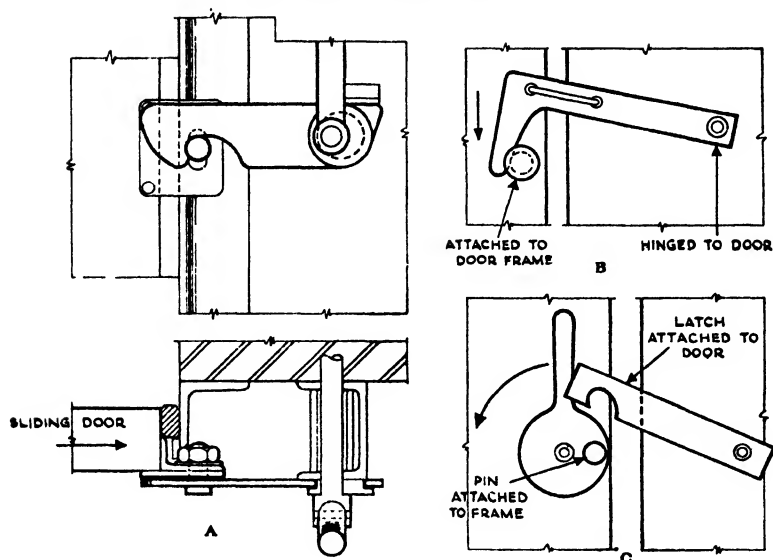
HINGED CAM ACTION TO CLOSE SLIDING DOOR
